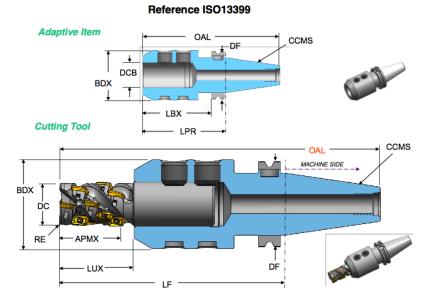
Cutting Tool, Tool Item, and Cutting Item 2
